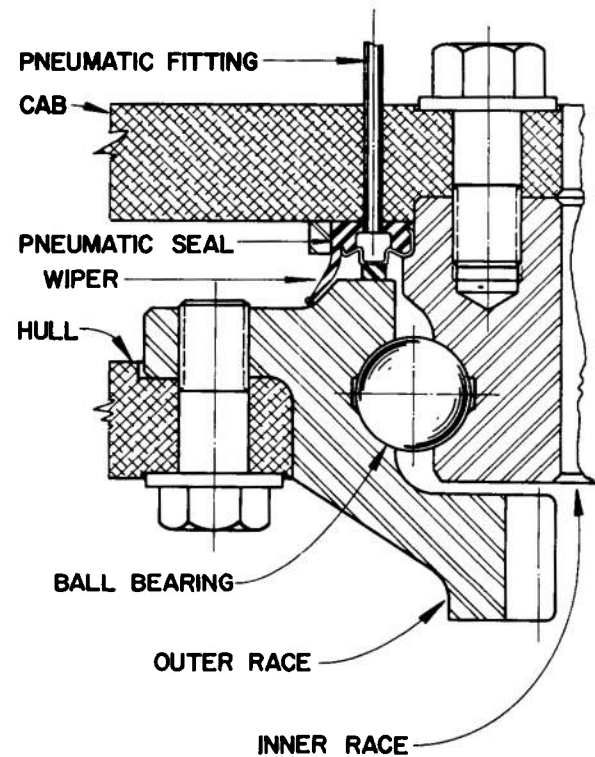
Pneumatic Turret Ring Seal on Self-propelled Howitzer
